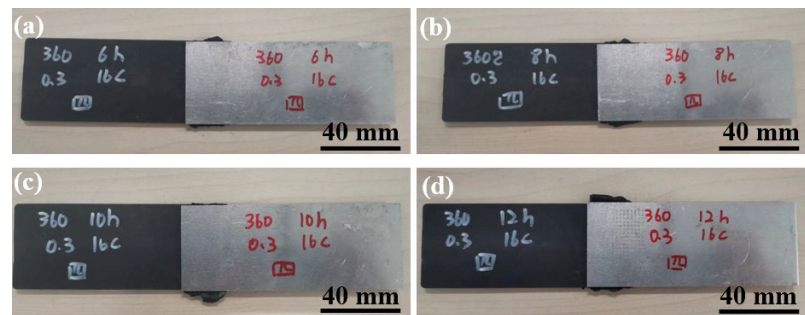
Macroscopic morphology of lap joints under four welding times: (a) 6 s; (b) 8 s; (c) 10 s; (d) 12 s.
